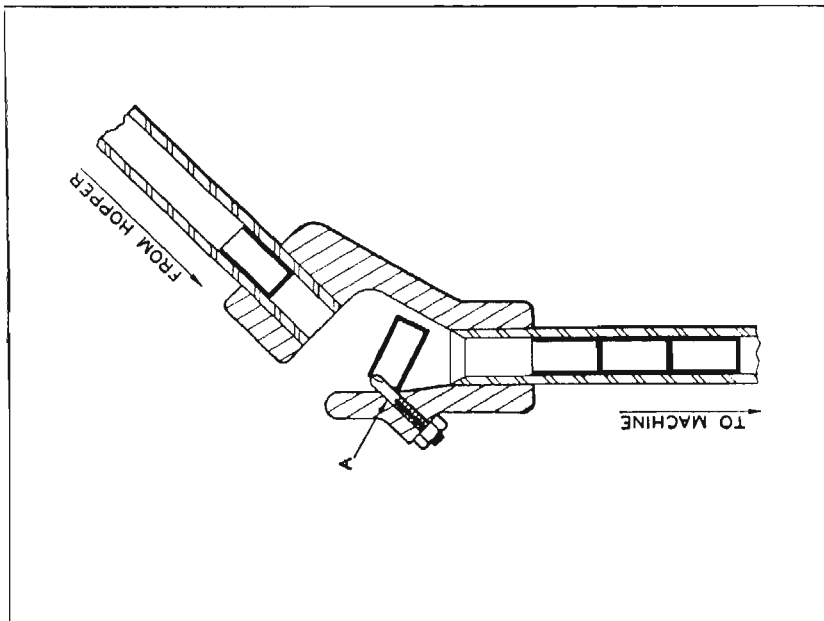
Cups are Turned Over or Passed through this Selector so as to Enter a Track in a Uniform Position for Feeding to a Machine.
